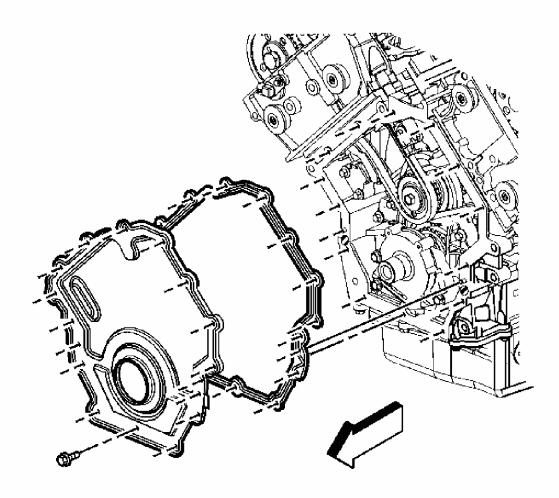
View of Engine Front Cover & Bolts Courtesy of GENERAL MOTORS CORP.
